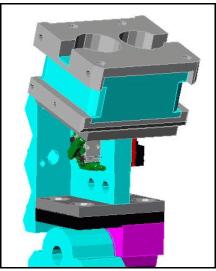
Upper Flex Joint assembled to Lower Thoracic Spine Assembly
